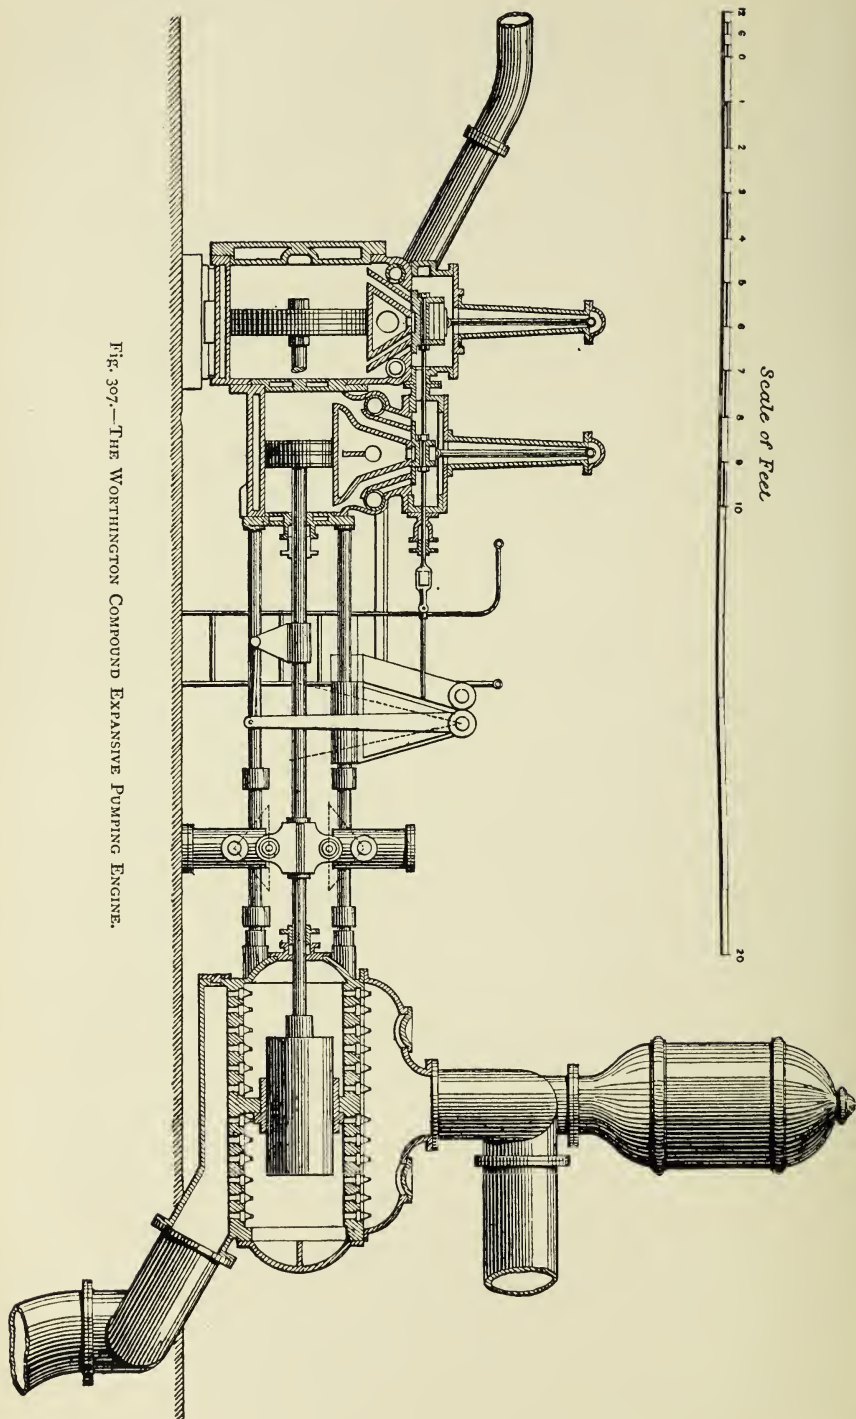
THE WORTHINGTON COMPOUND EXPANSIVE PUMPING ENGINE.
